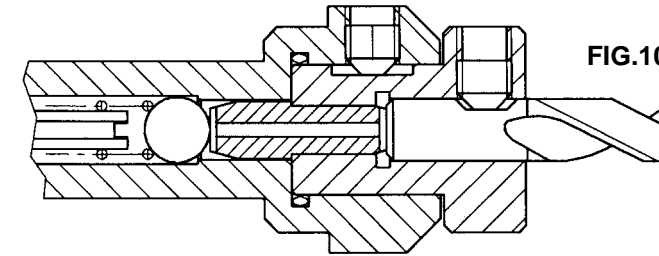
ASSEMBLING THE BIT-SPACER UNIT
